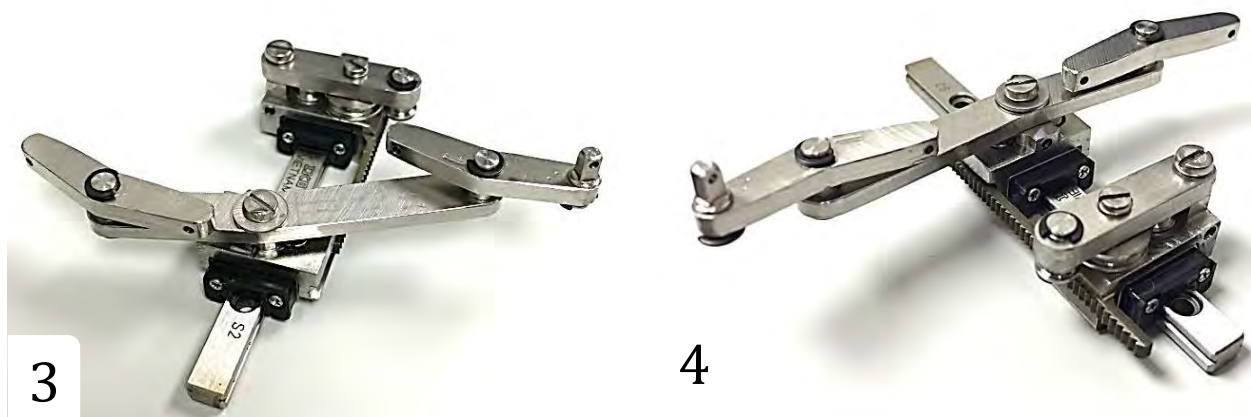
Assembly stages of the differential seesaw mechanism (Part 2)
